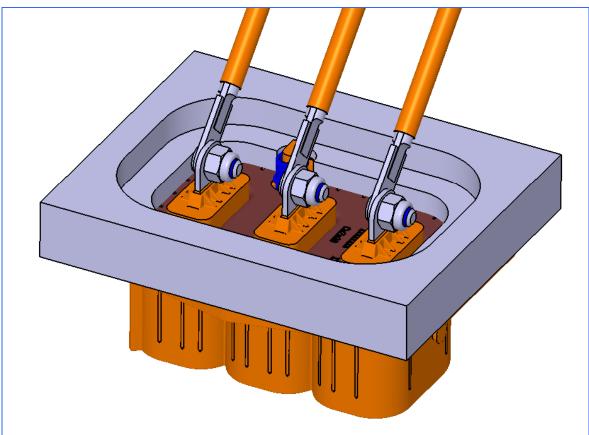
Wiring screwed to the KOSTAL tab header
